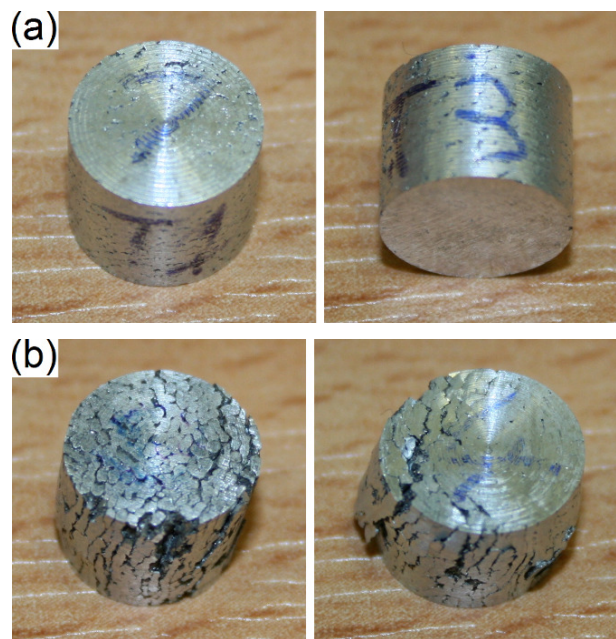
Photographs of examples of 20 wt% Cu /6061 compression samples: (a) before testing; (b) post testing (failed).
